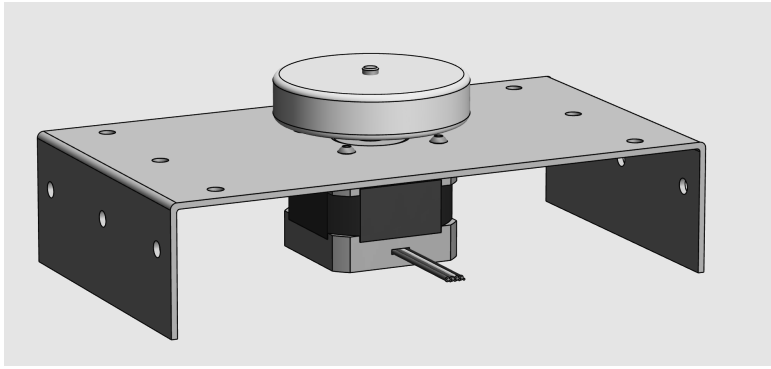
Stepper motor with rotating magnetic drive plate mounting plate.
